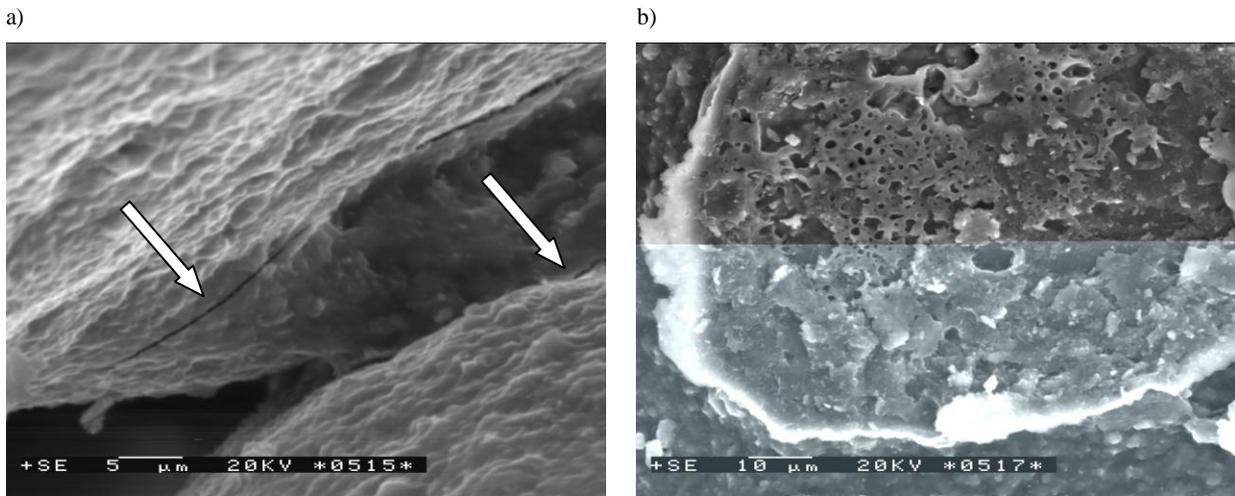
Linking bridges in moulding sand with waterglass 145 and with bentonite addition, after baking at 700 °C: a) two-sided destruction of adhesive-type bridge, b) base of a linking bridge
